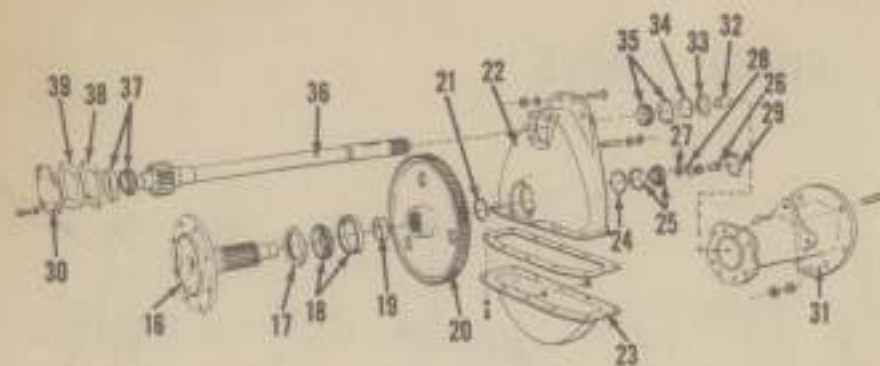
Final drive and rear axle unit. Shims (38 and 39) control bull pinion shaft bearing adjustment. Shims (27) control wheel axle shaft bearing adjustment. Bushing (32) is the same part as (9—Fig. 130) which is pressed in the differential case.
